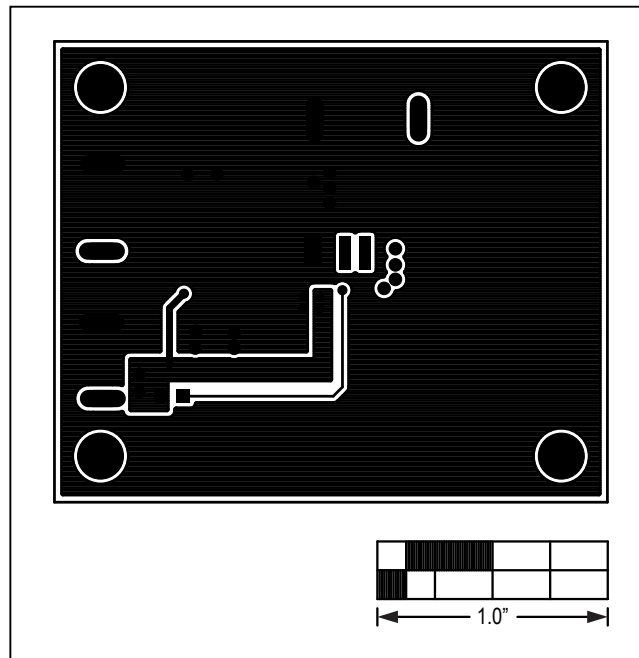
MAX17515 EV Kit PCB Layout—PGND Layer 2
